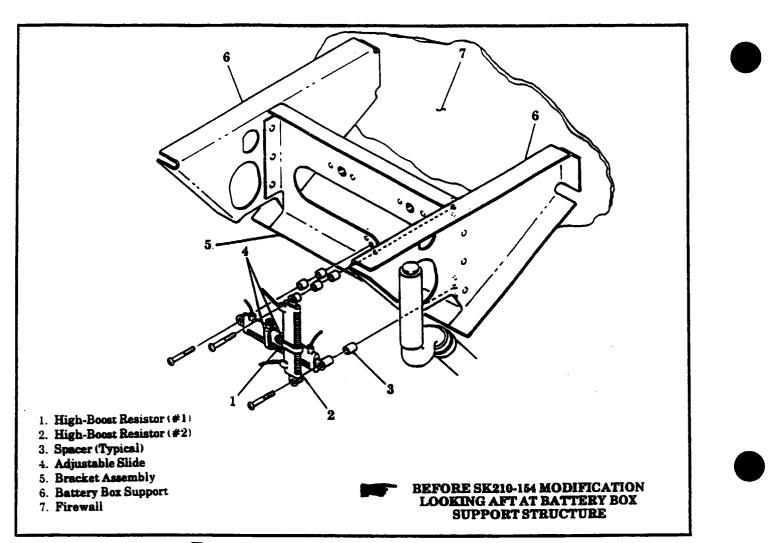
Auxiliary Fuel Pump Resistors (Sheet 1 of 2)
